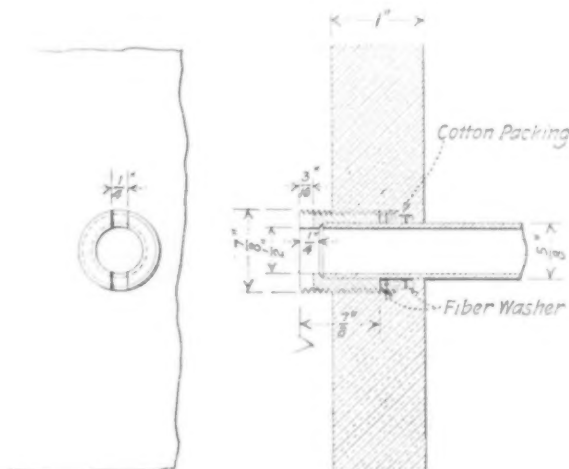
METHOD OF SECURING CONDENSER TUBE IN TUBE SHEET
